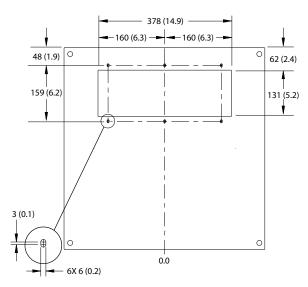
Dimensions for Opening in Cabinet Top Plate
